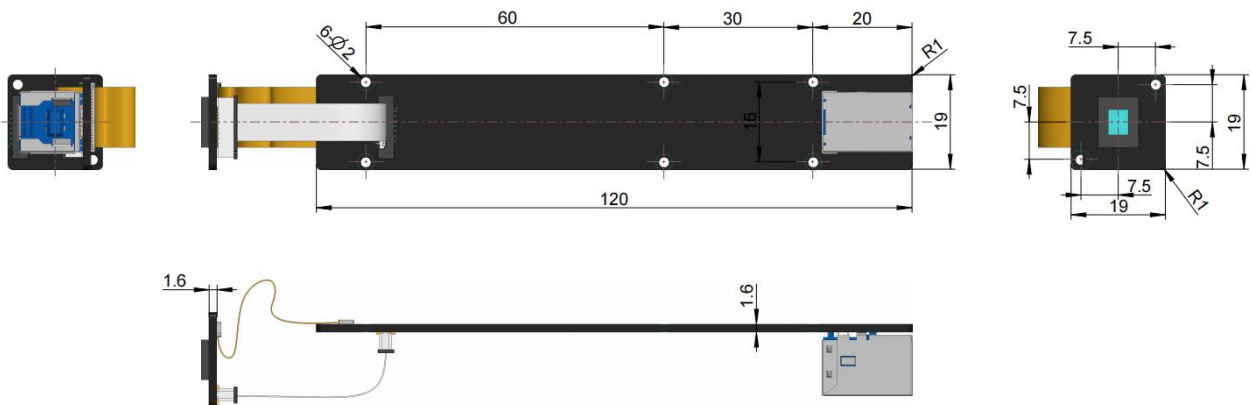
52 Dimensions of OEM4 circuit board (mm)
